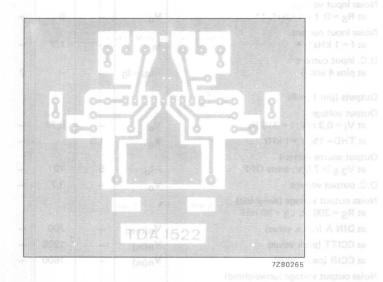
Printed-circuit board, showing track side. Dimensions 75 mm x 65 mm.
